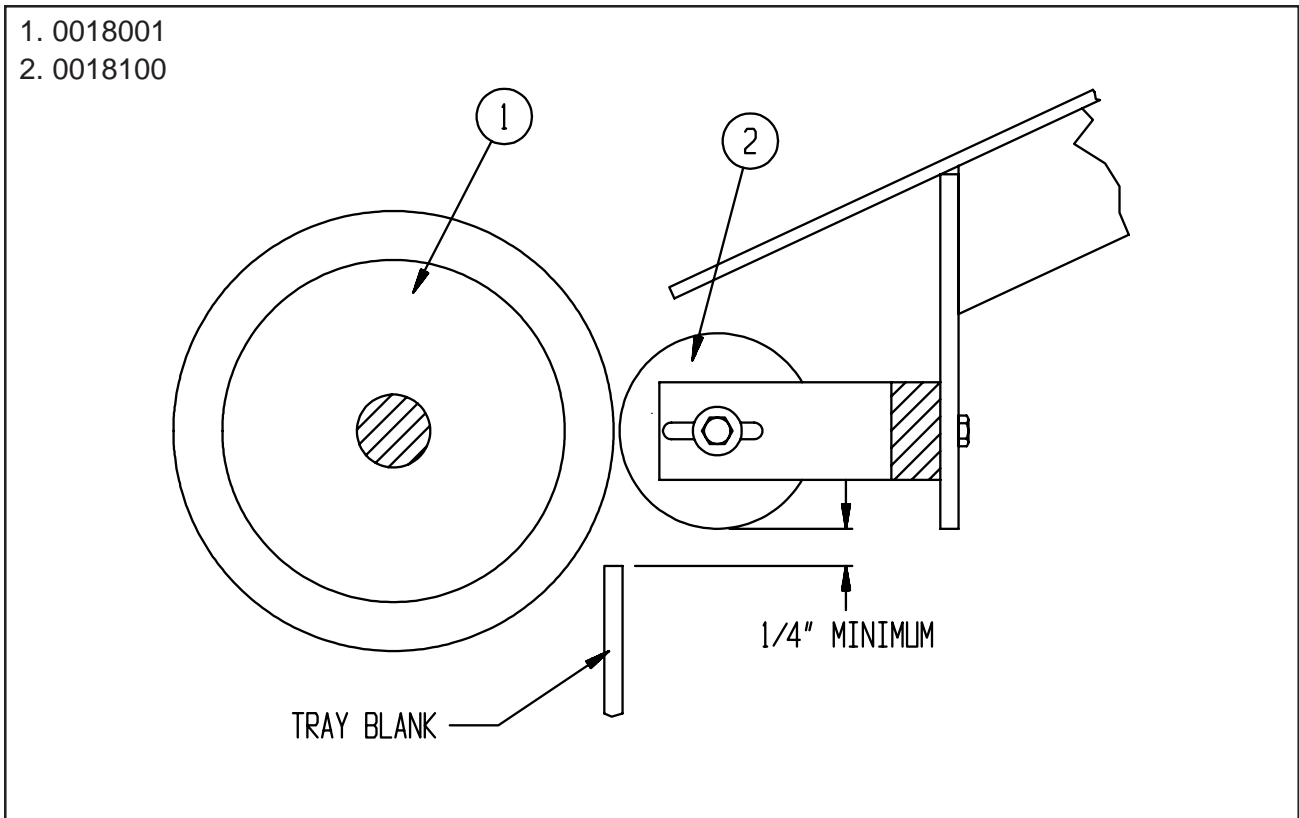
B: Adjust Blank Feed Roll Assembly/ Without Blank Rebound Stop
